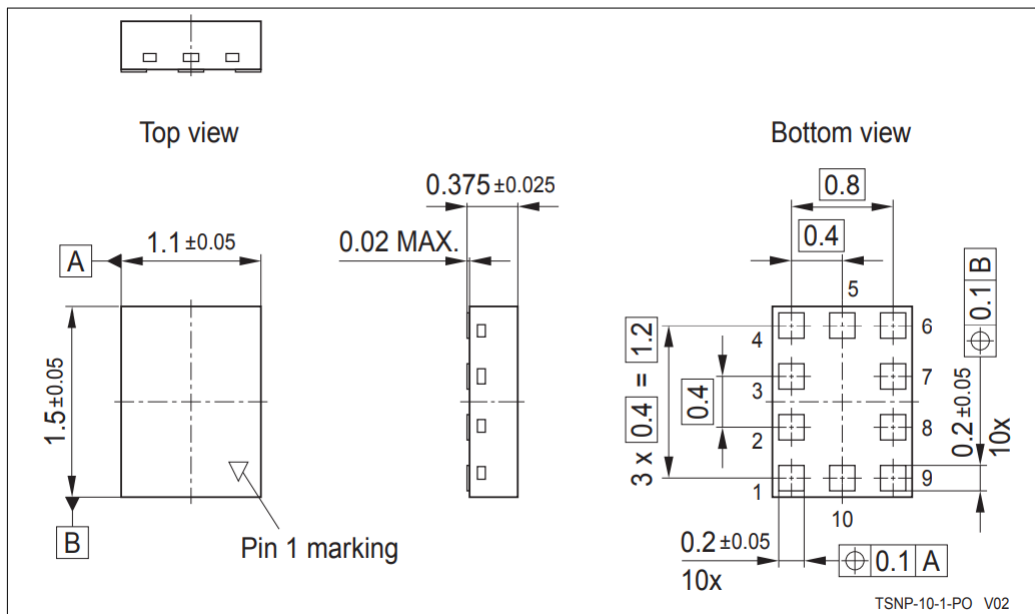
TSNP-10-1 Package Outline (Top, Side and Bottom Views)
